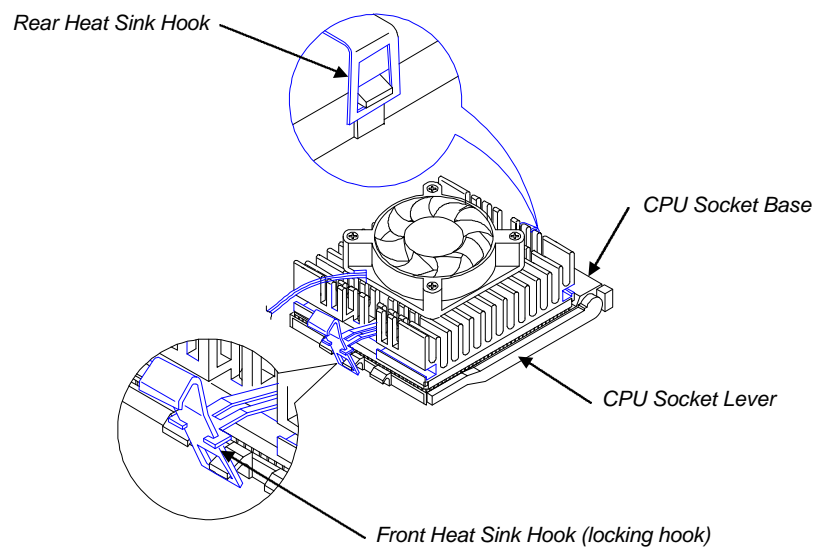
Installing the Hook-Type Heat Sink and Fan
